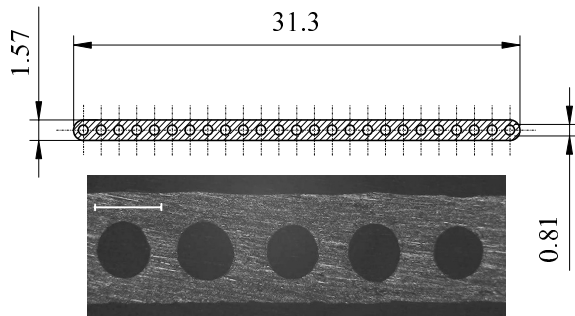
Cross-section drawing and enlarged photo of the multiport extruded (MPE) test tube (1 mm scale in upper left corner of photo)
